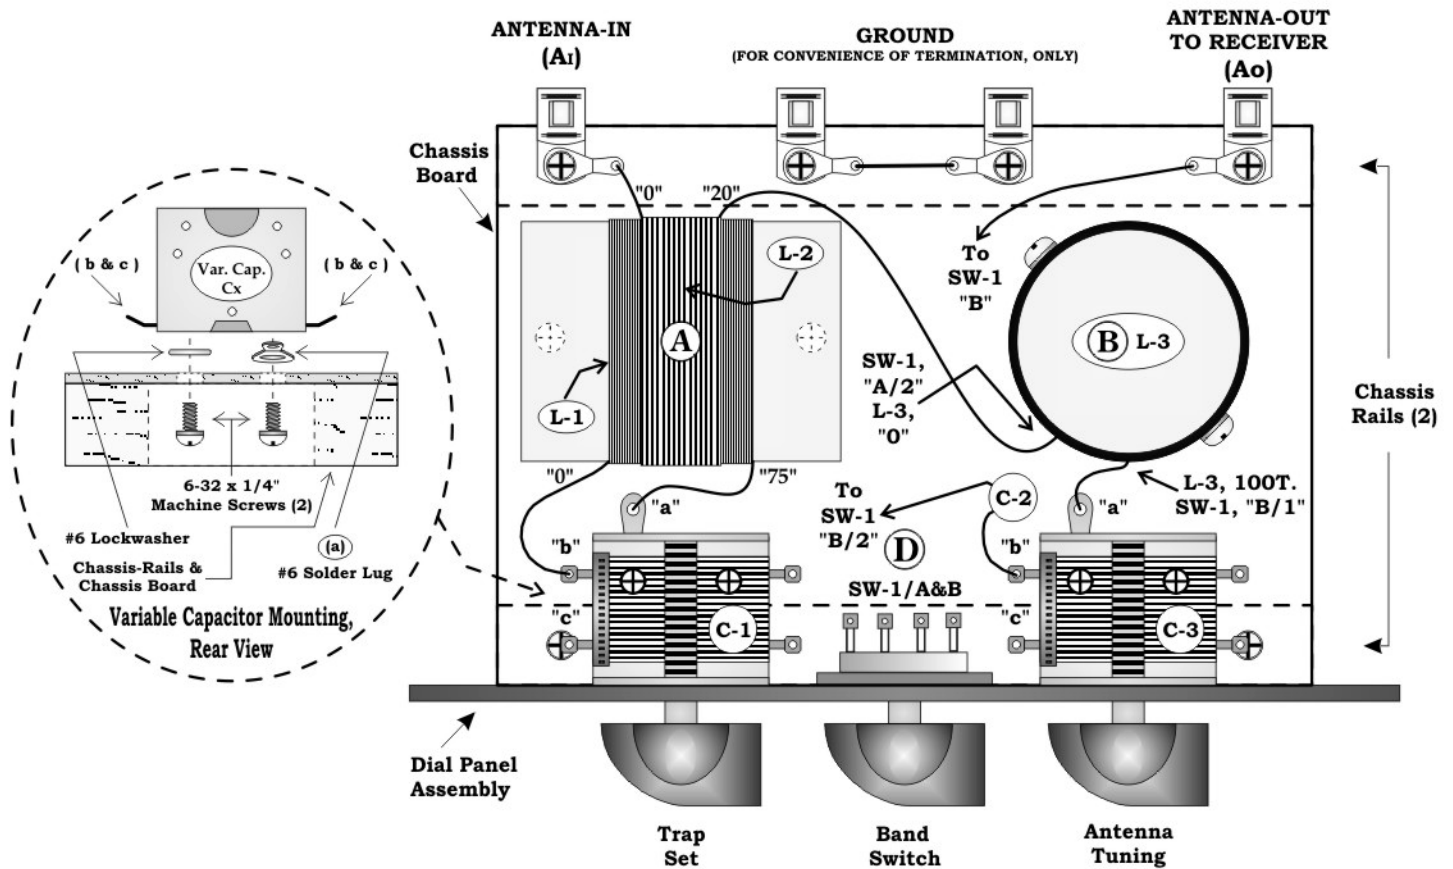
, Coil Assembly/Mounting/Wiring Details
